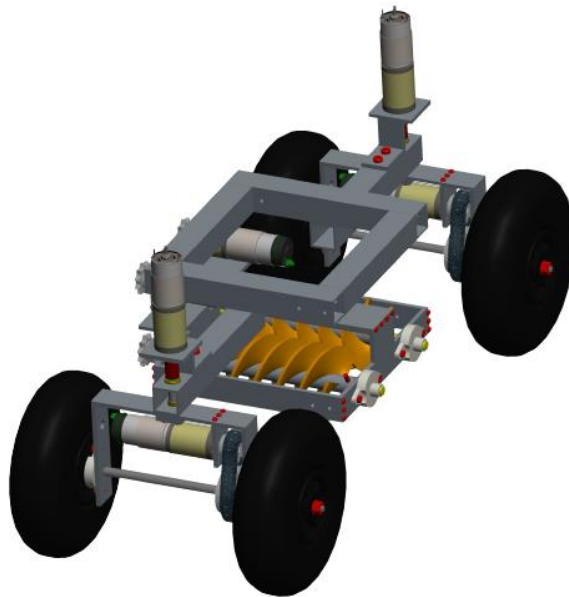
Third design of the Robo-Weeder with the 4 inch auger system.
